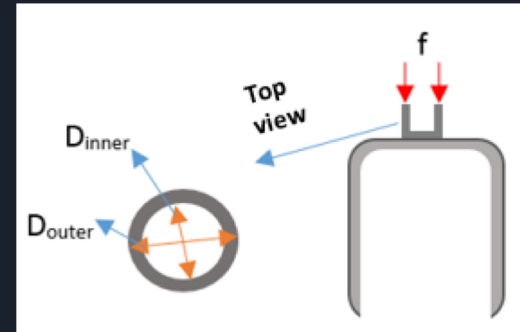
Inner and outer diameter of the lower part of the supporting channel
